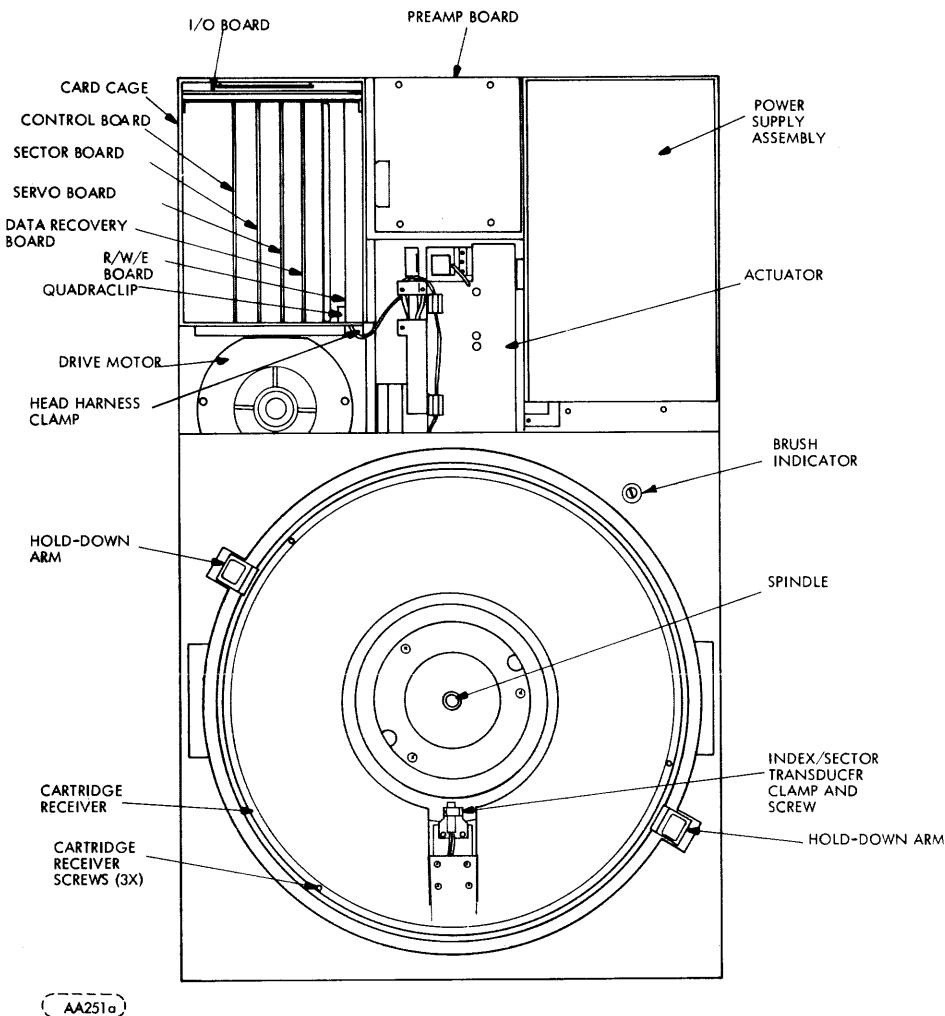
MODULE LOCATION (ABOVE DECK)
